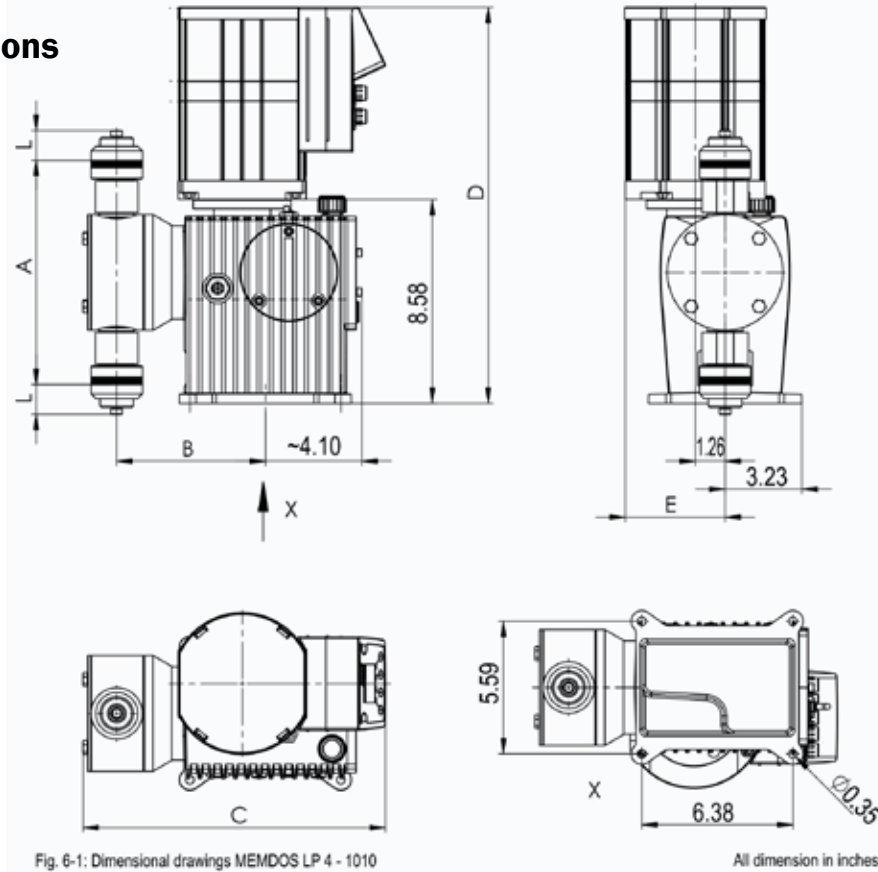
Dimensional drawings MEMDOS LP 4 - 1010
